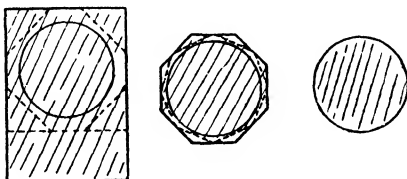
How to cut a disc, using a saw, chisel and glass paper
